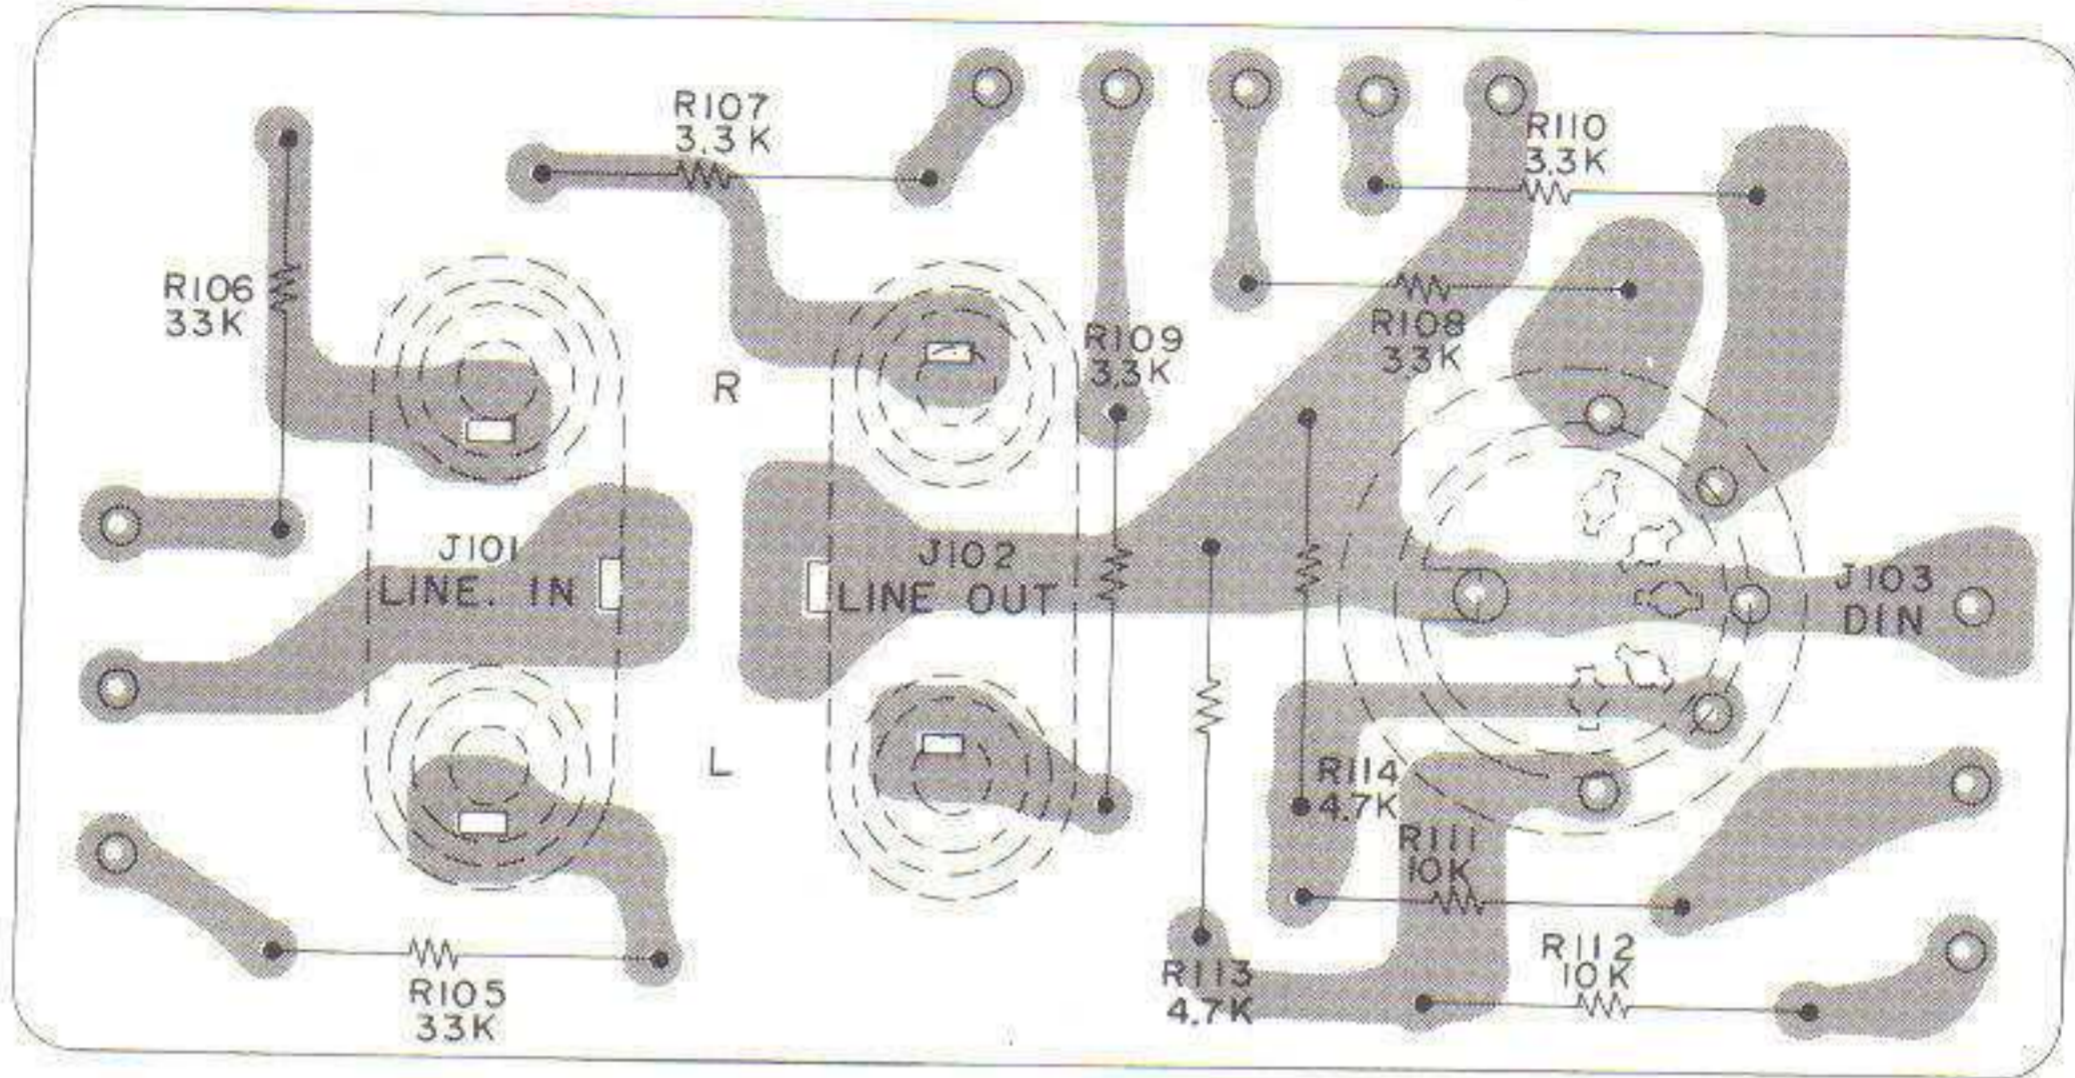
Bottom View of Jack P.C. Board (For TZ)
